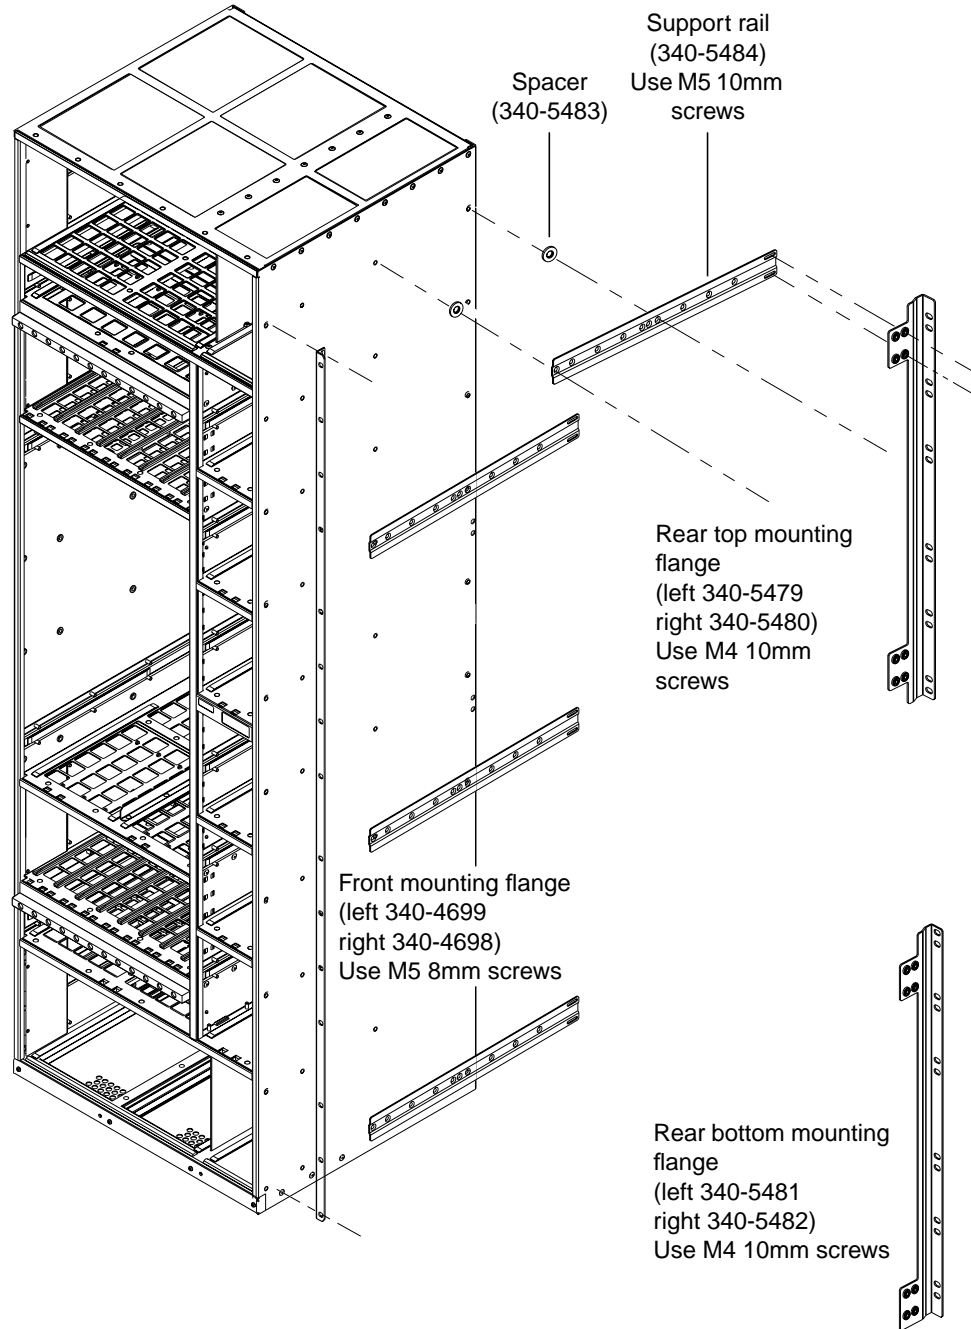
19-inch Rack Mounting Flange Kit
